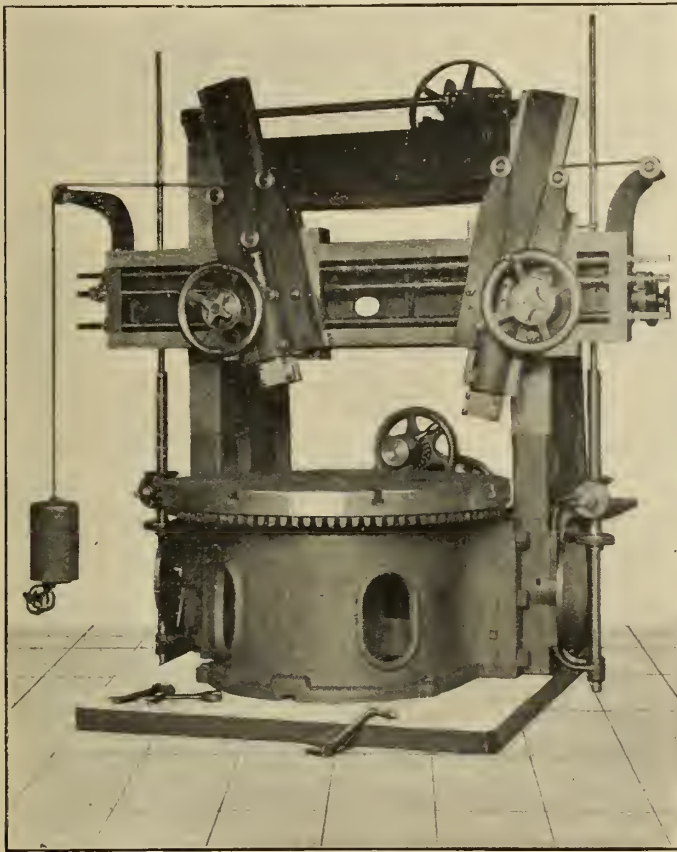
Sixty-inch Mill, With Fractional Feeds and Independent Heads.
